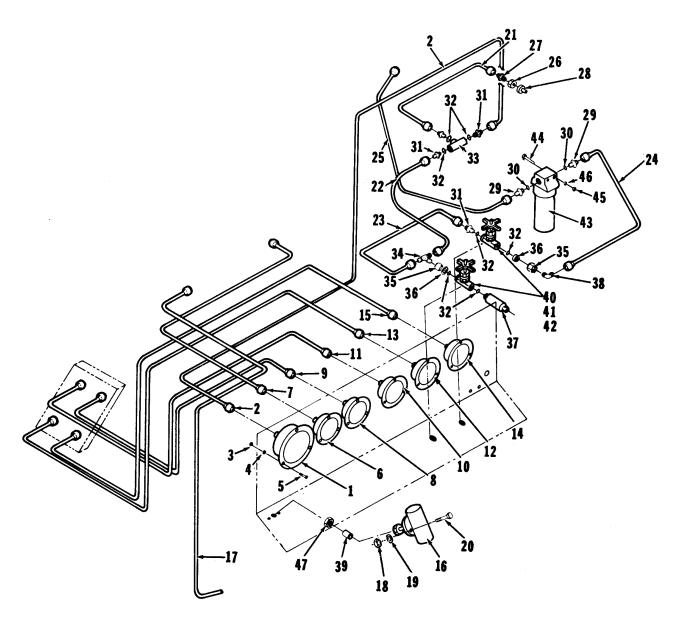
Pressure gauges, high pressure air filter, regulating valve, lines and fittings.
